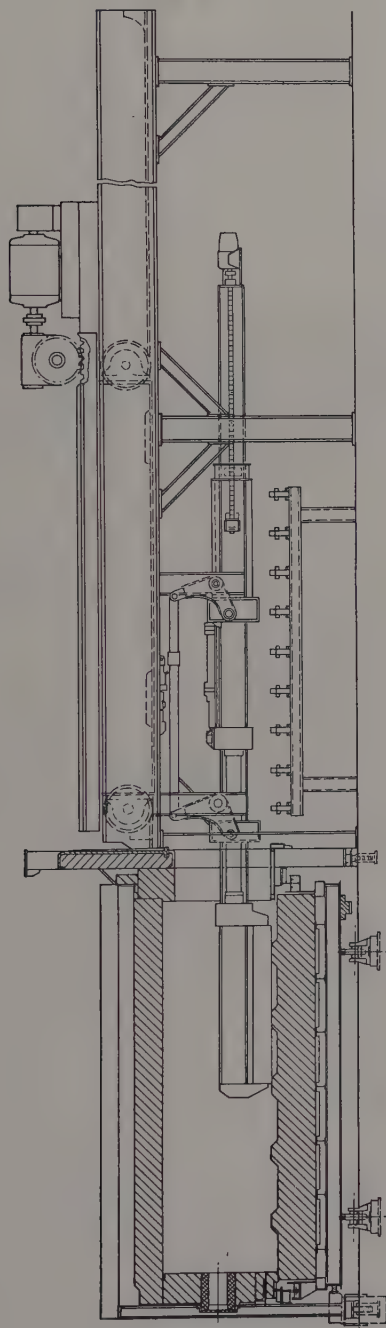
Furnace charger with longitudinal clamping. Courtesy of George J. Hagan Co.
